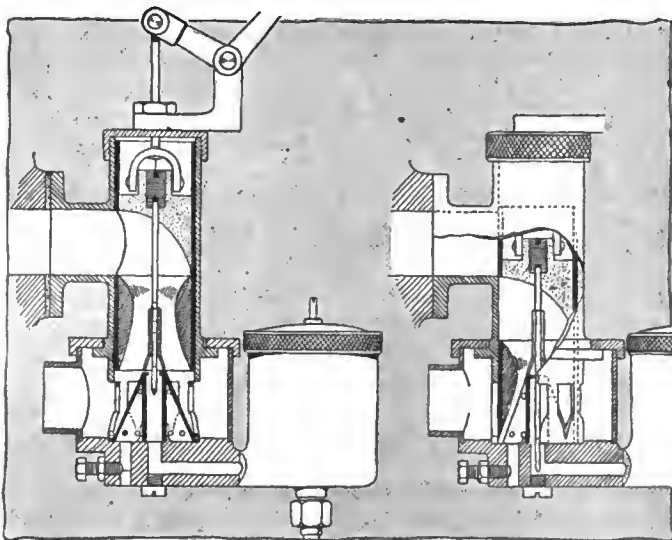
Part sectional views of Cox carbureter, left with throttle open, right with throttle closed
